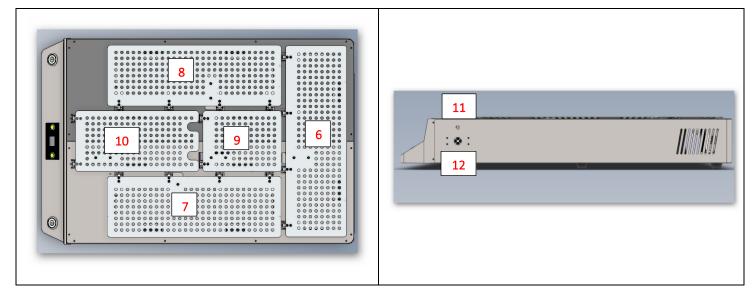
T-FOLD UPPER SECTION PARTS
